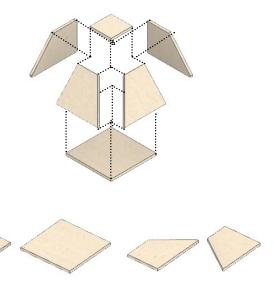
Corner piece build up out of 18 mm straight plywood plates with no angled cuts
